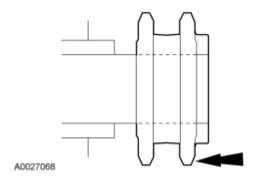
Identifying Crankshaft Sprocket Flange Courtesy of FORD MOTOR CO.
